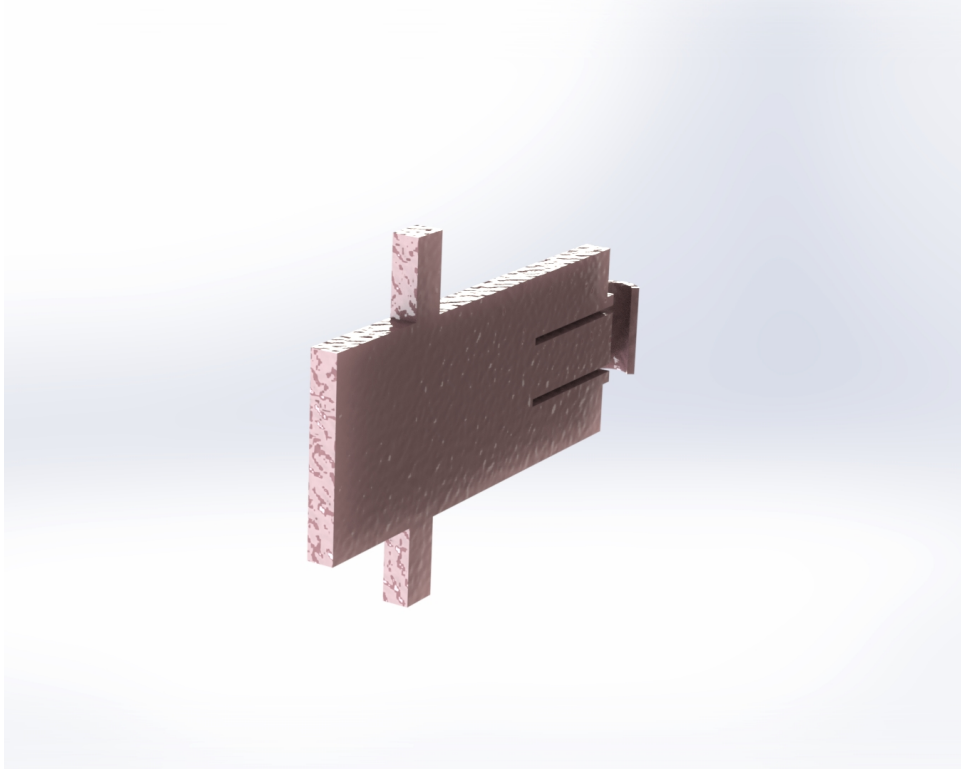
Rough CAD of tensioner arm without the new gear head, bearings, and pins
